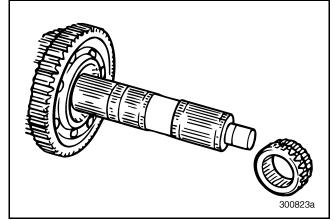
Installing Lo/Reverse Sliding Clutch onto Mainshaft (T313L/T318L Shown)
